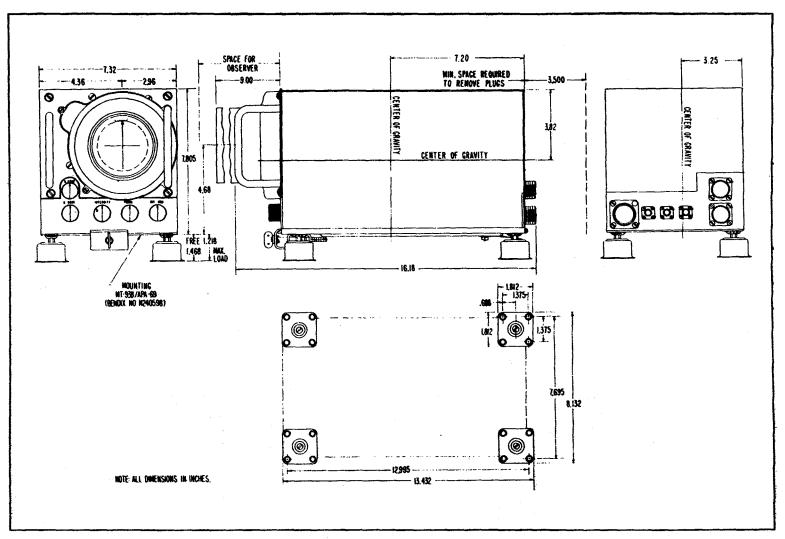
Azimuth Indicator IP-36/APA-69 and Mounting MT-938/APA-69, Outline and Mounting Dimensions
